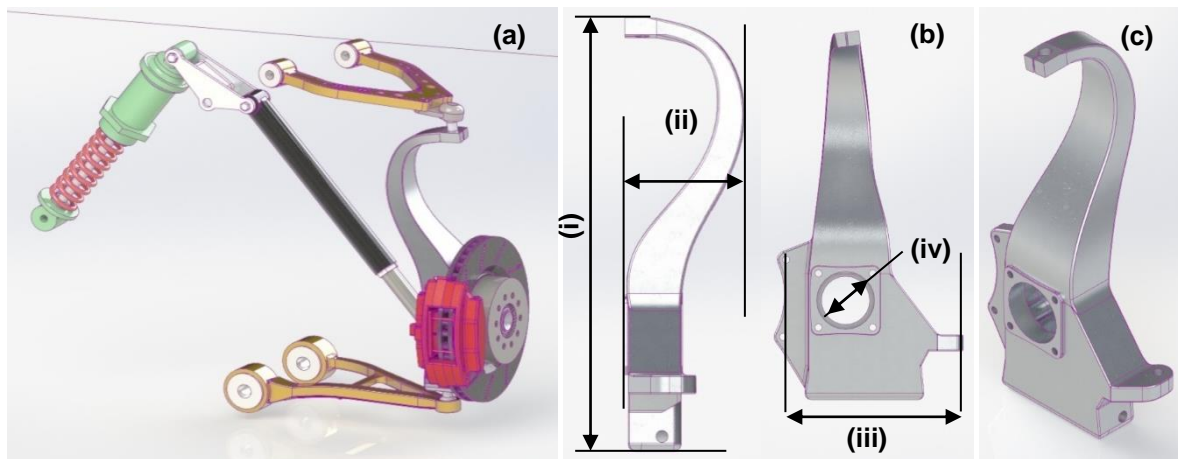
(a) Anterior view for the pushrod suspension system, (b) dimensional restrictions and (c) isometric view of the knuckle
